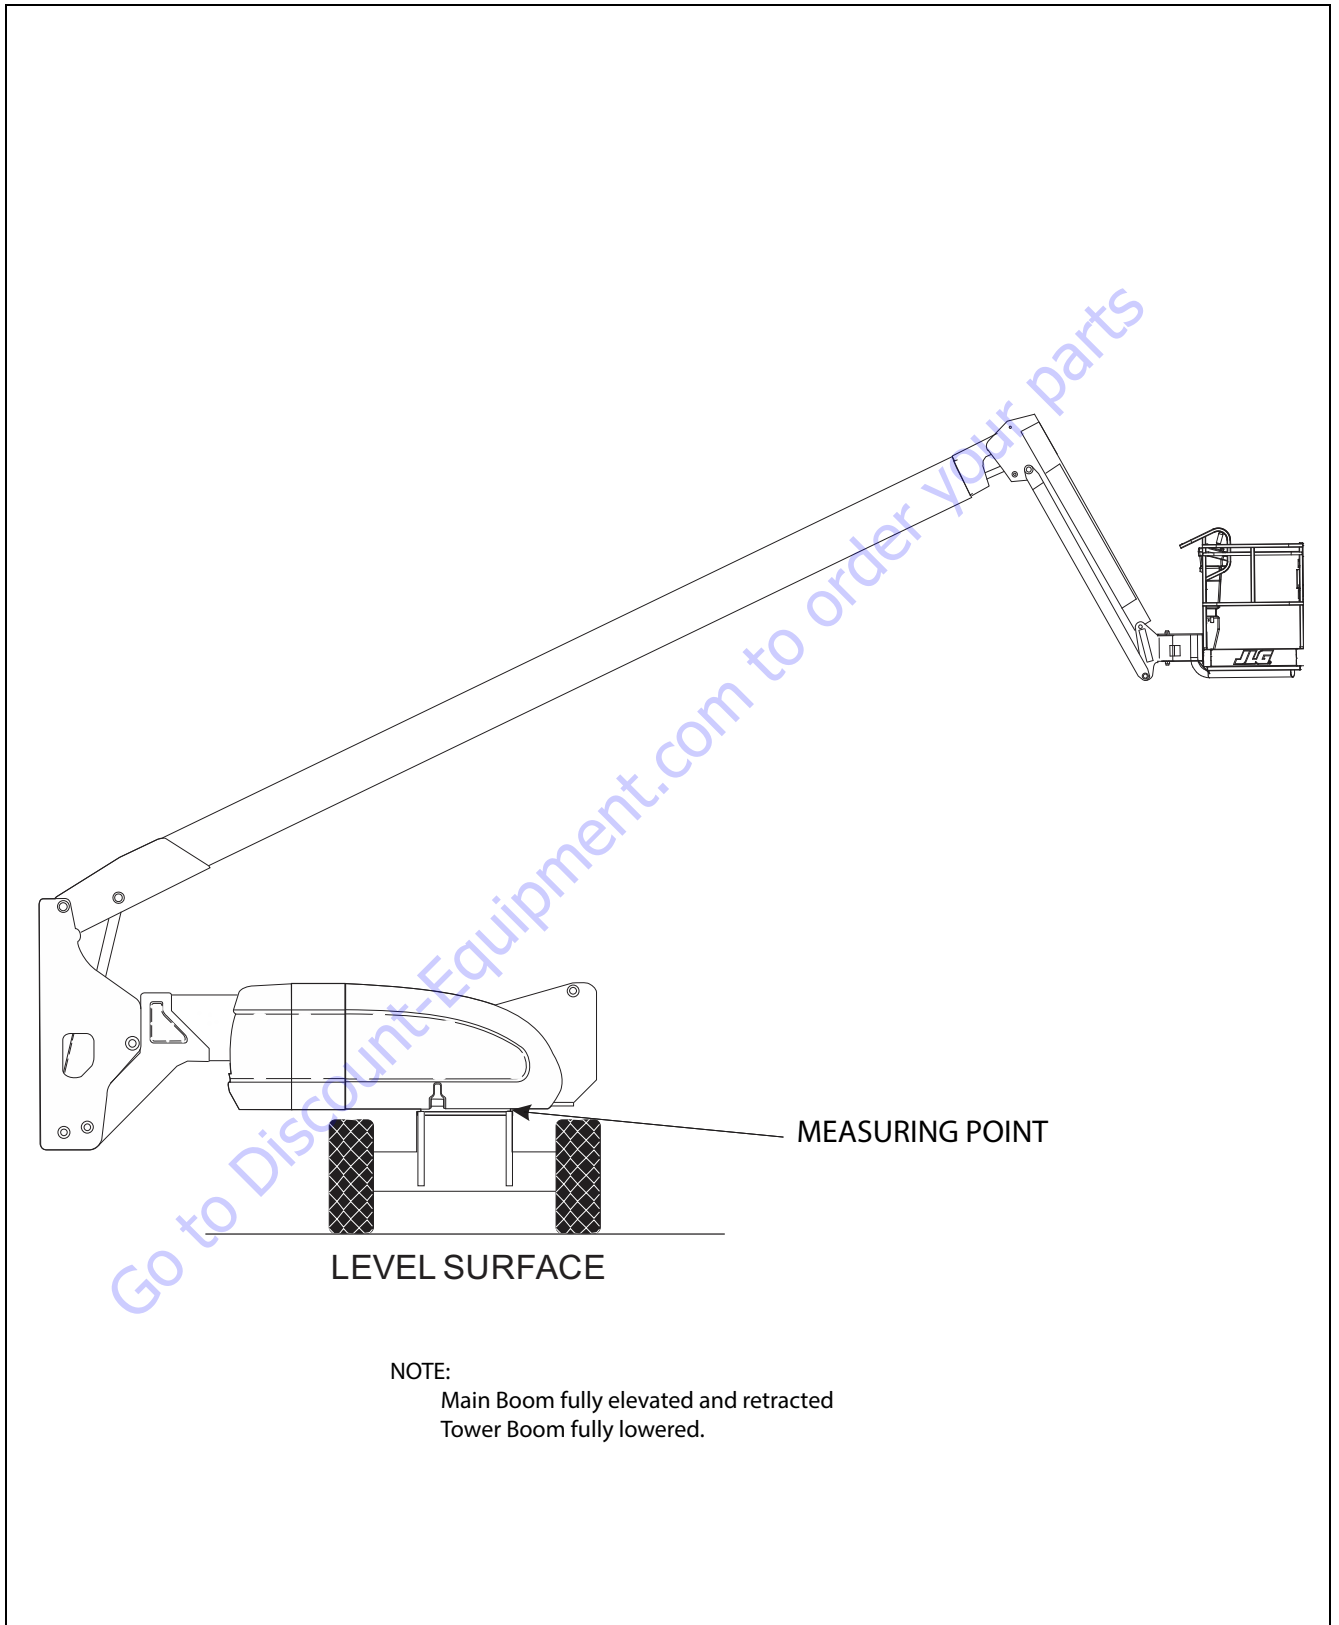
Swing Bearing Tolerance Boom Placement (Sheet 1 of 2)
